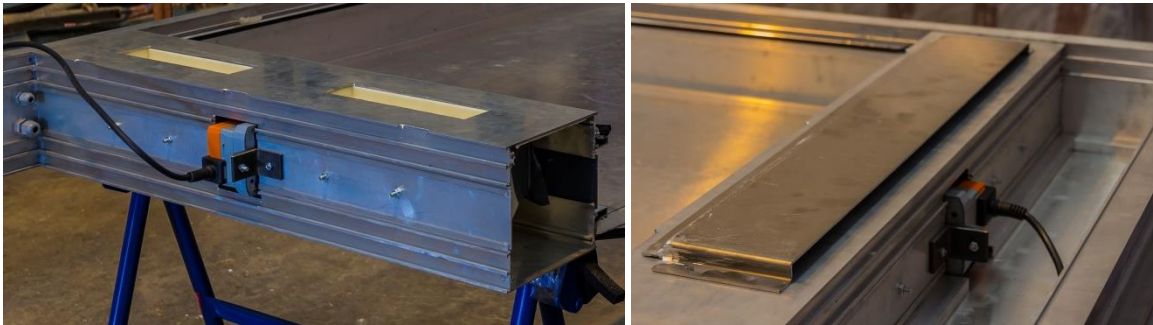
Aluminum frame, louvres and actuators in the assembly process.
